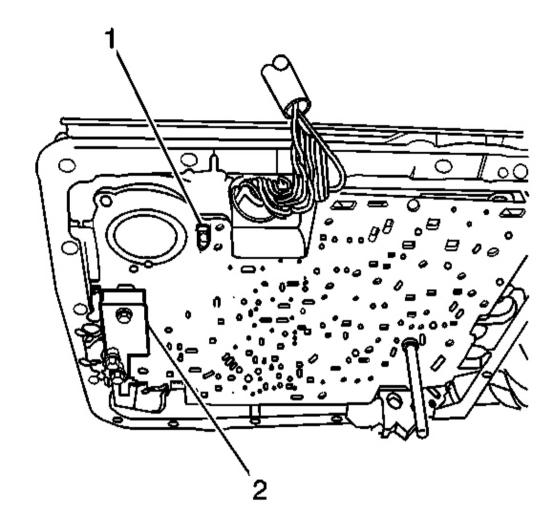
Ensuring Checkball Has Remained In The Proper Location Courtesy of GENERAL MOTORS CORP.
